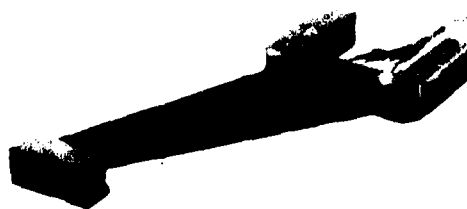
Wing specimen with tubes installed and fiberglass overwrap.
